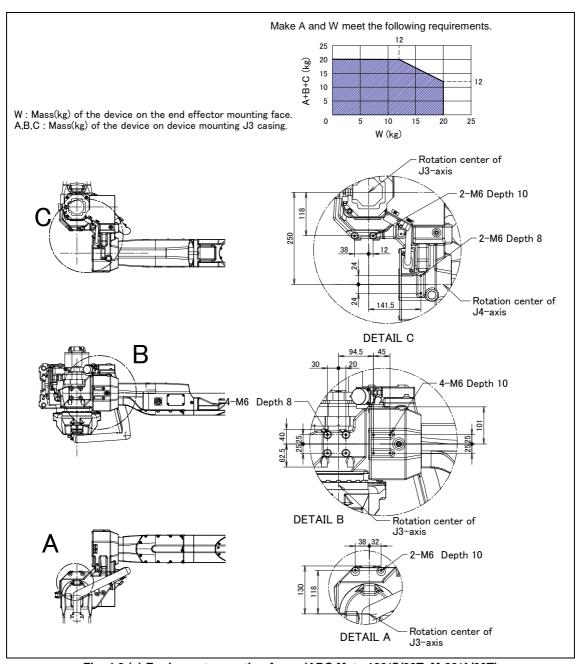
(a) Equipment mounting faces (ARC Mate 120iC/20T, M-20iA/20T)
